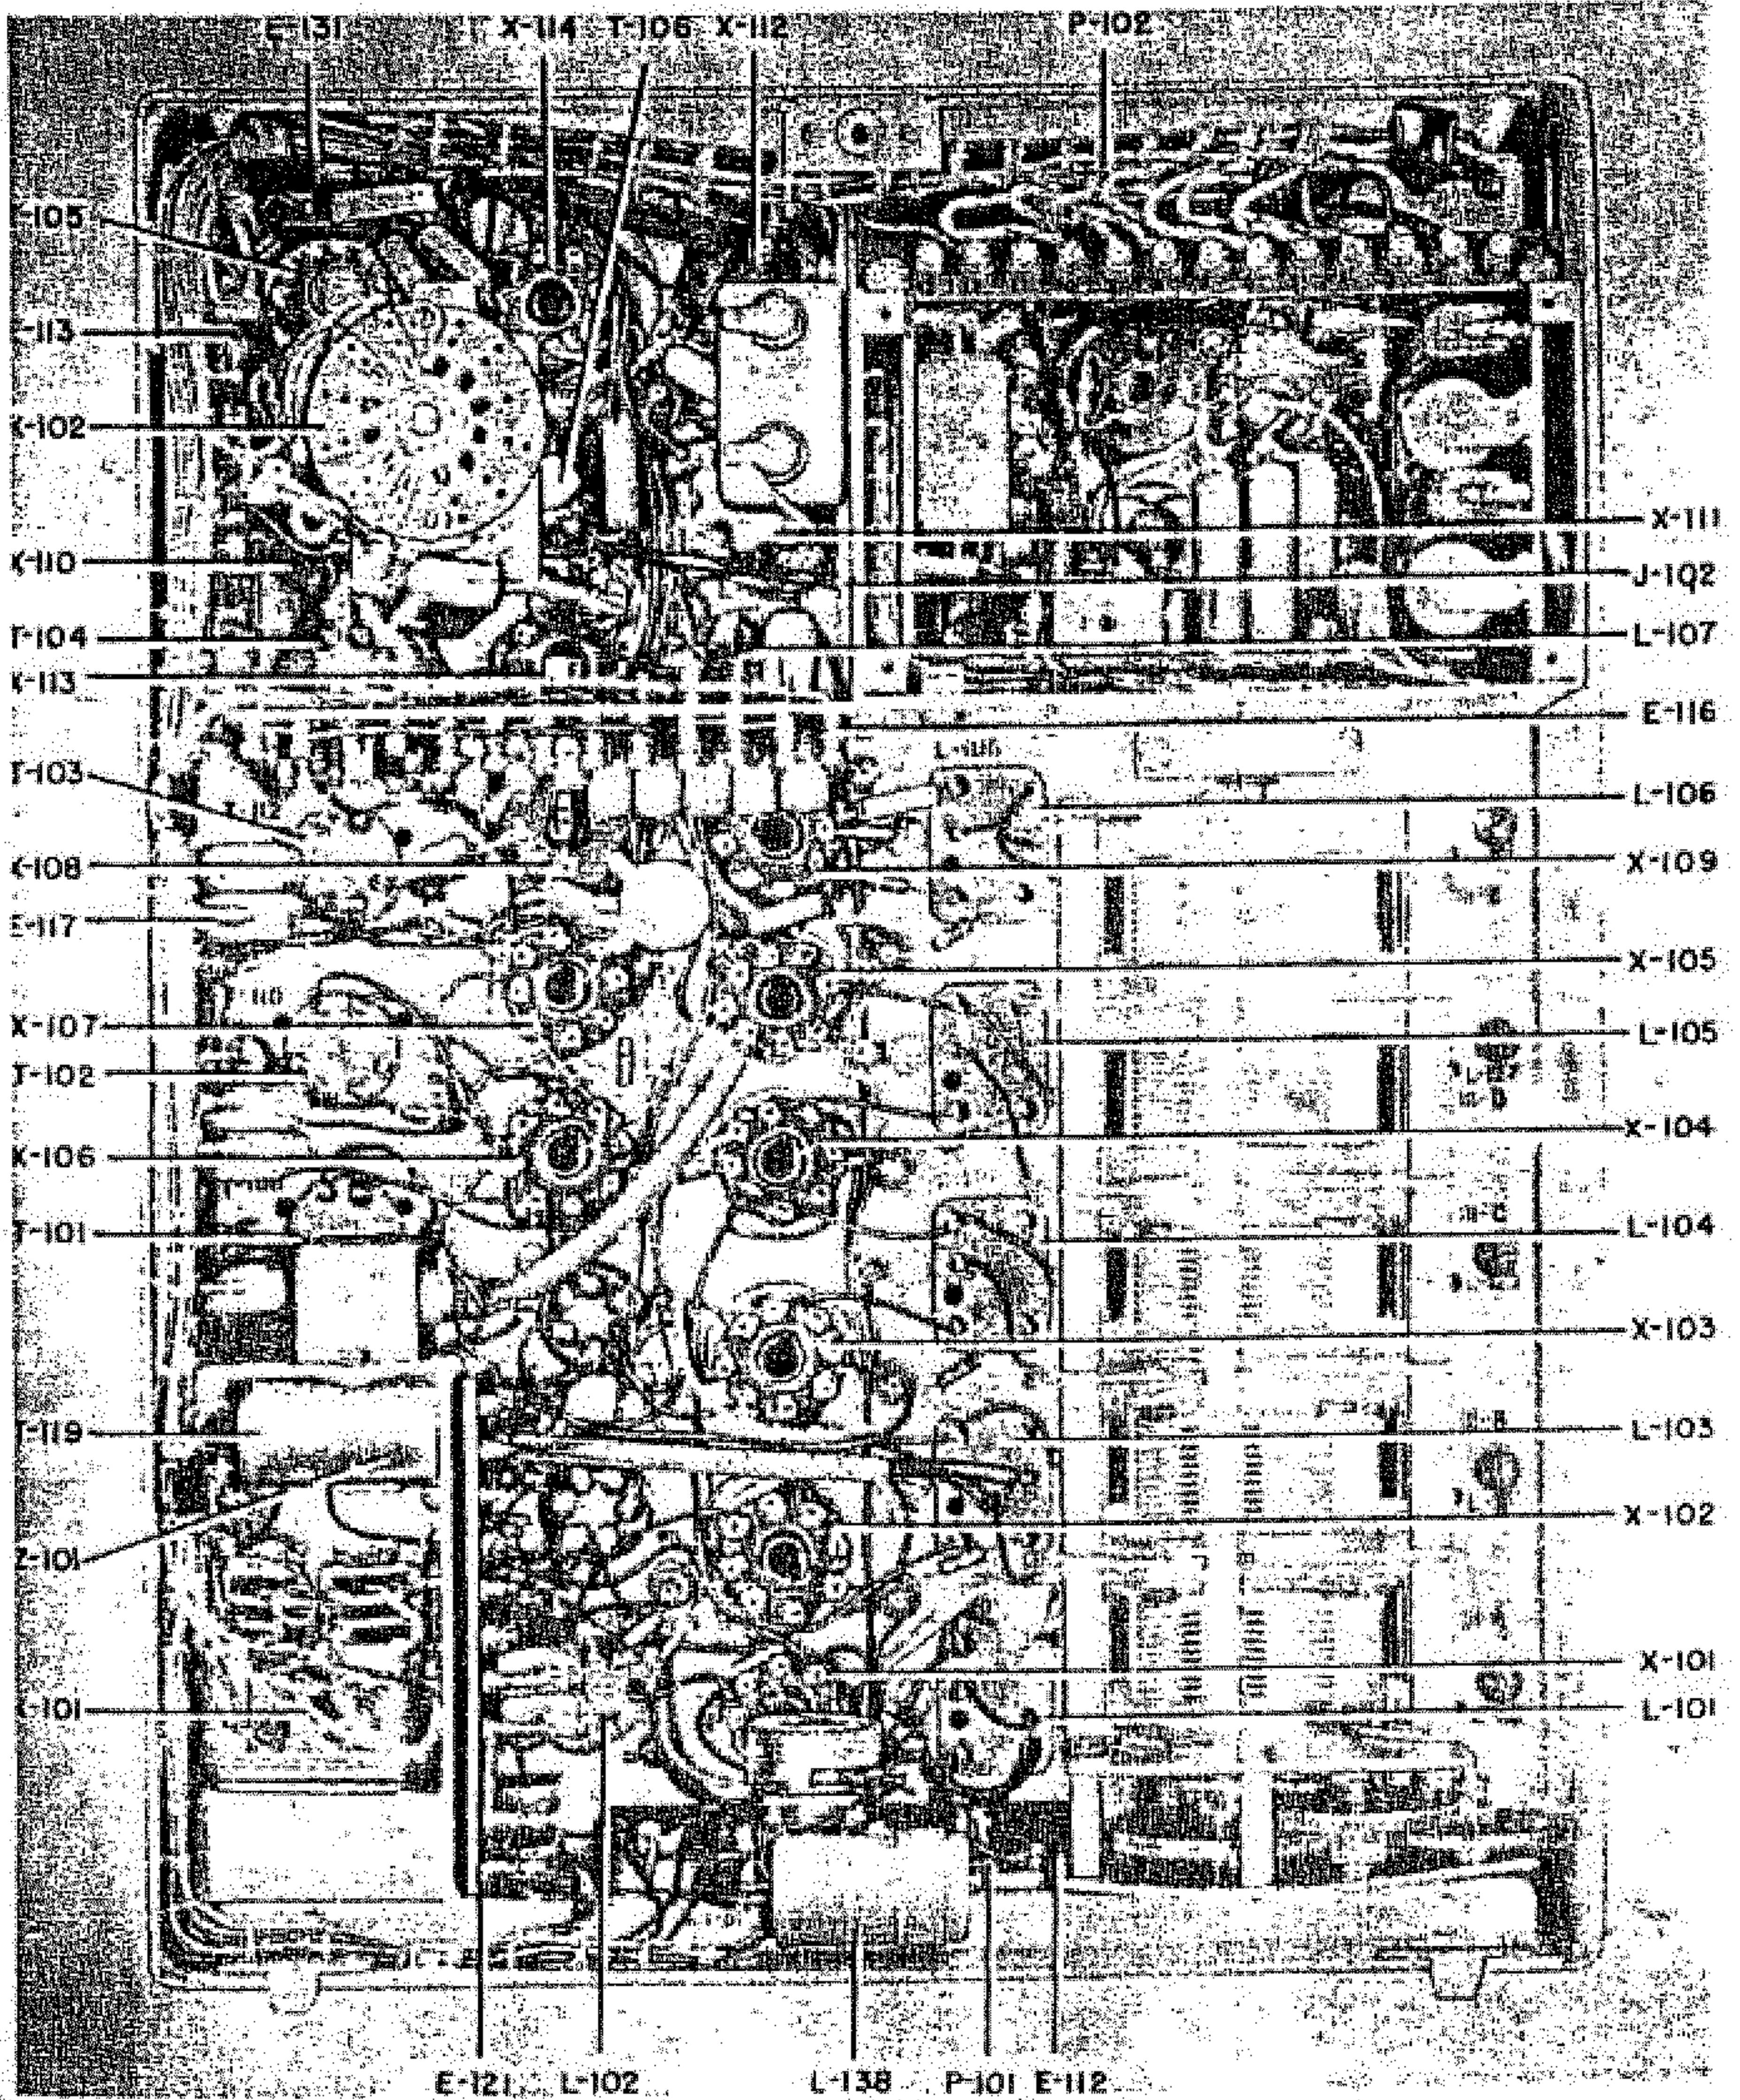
Radio Compass Unit R-101/ARN-6, Bottom View, Cover Removed
